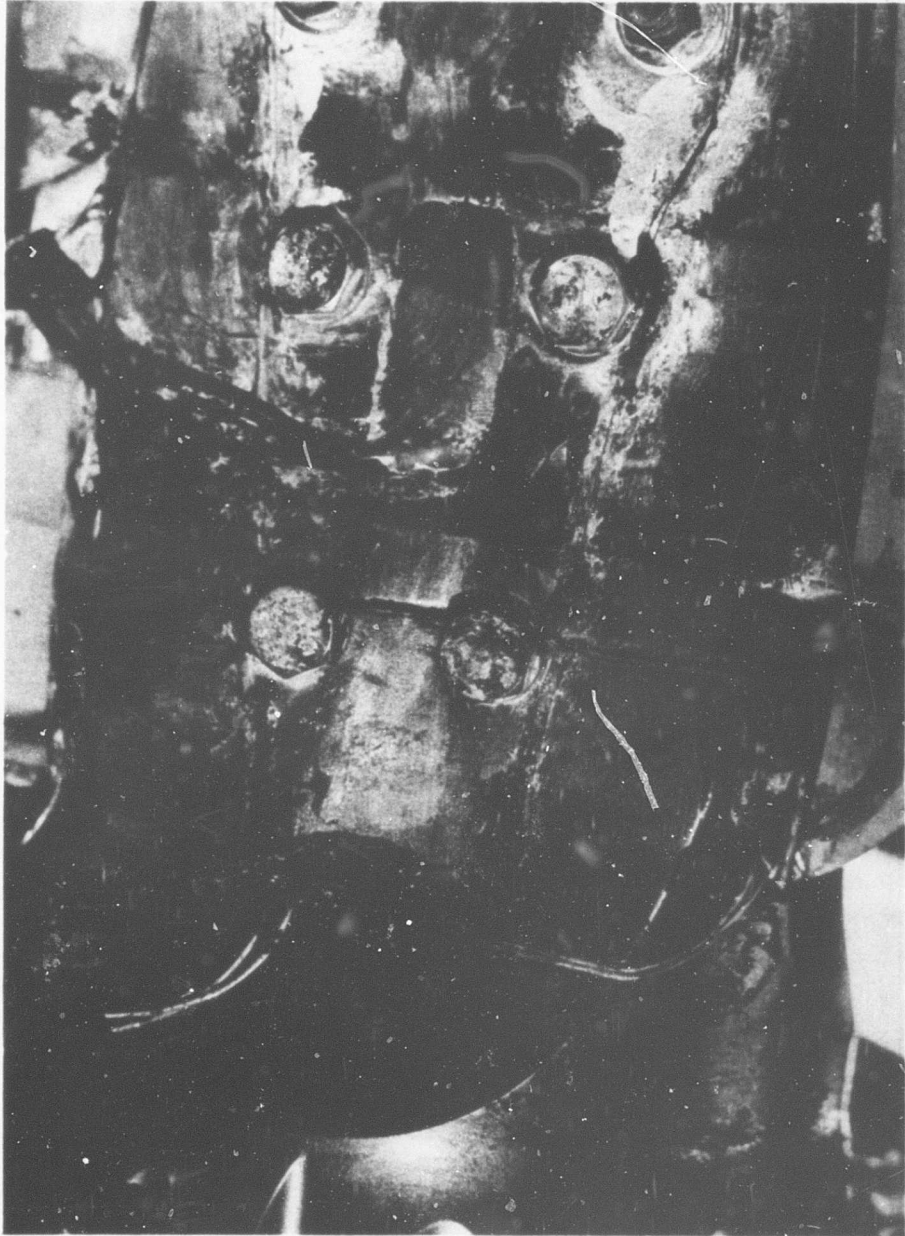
Typical Main Rotor Cuff Fatigue Fracture.
